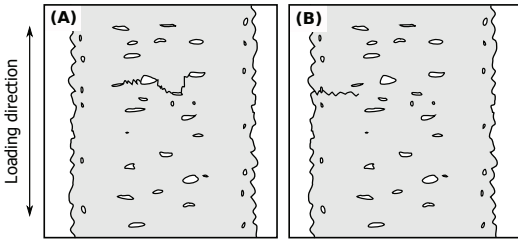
Failure mechanisms in specimens. Schematic illustration of: (a) failure from internal defects and (b) failure from surface defects.
